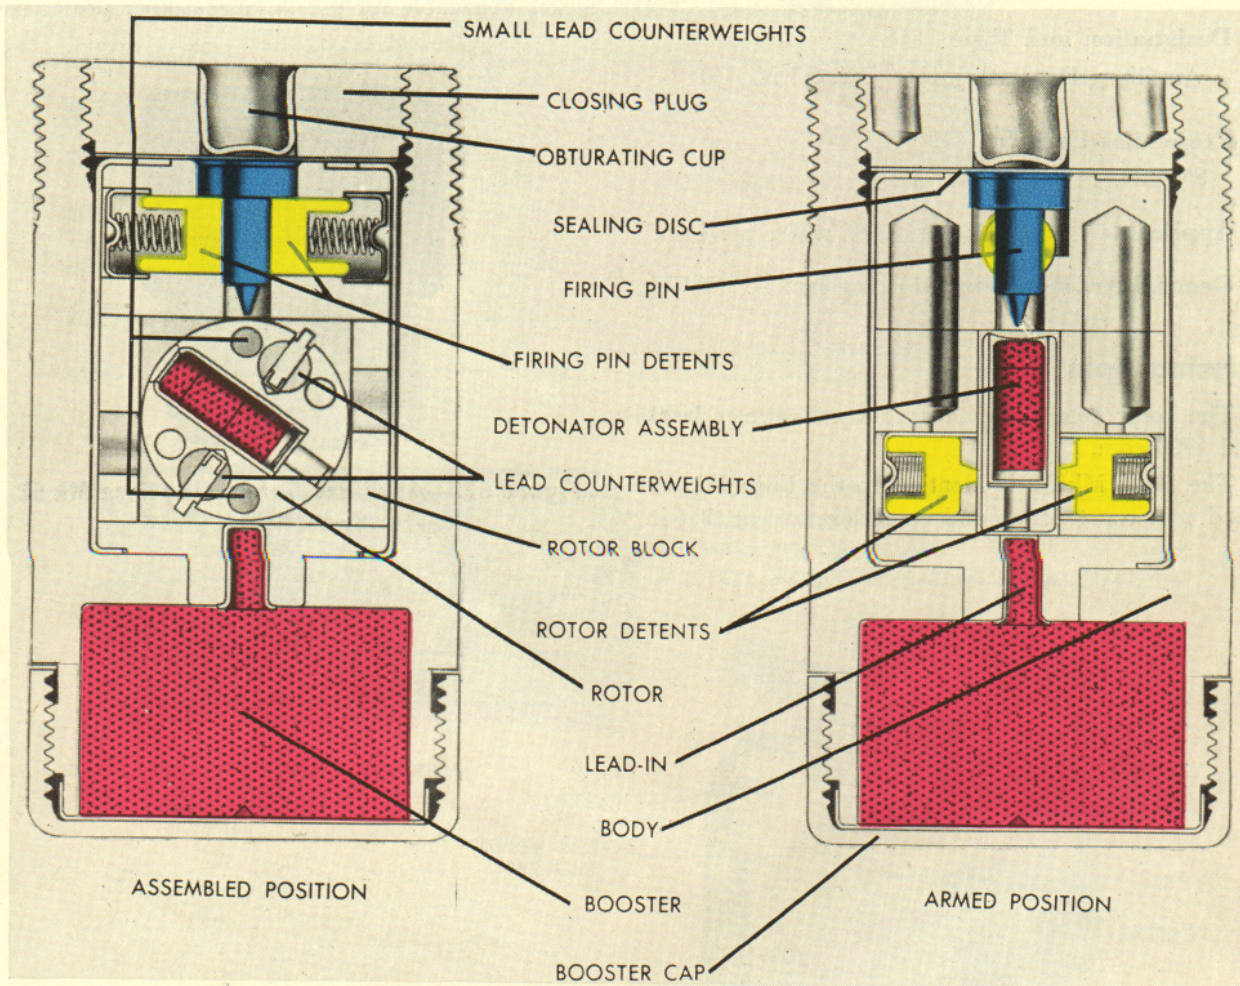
Auxiliary Detonating Fuze Mk 54—Sectional View
